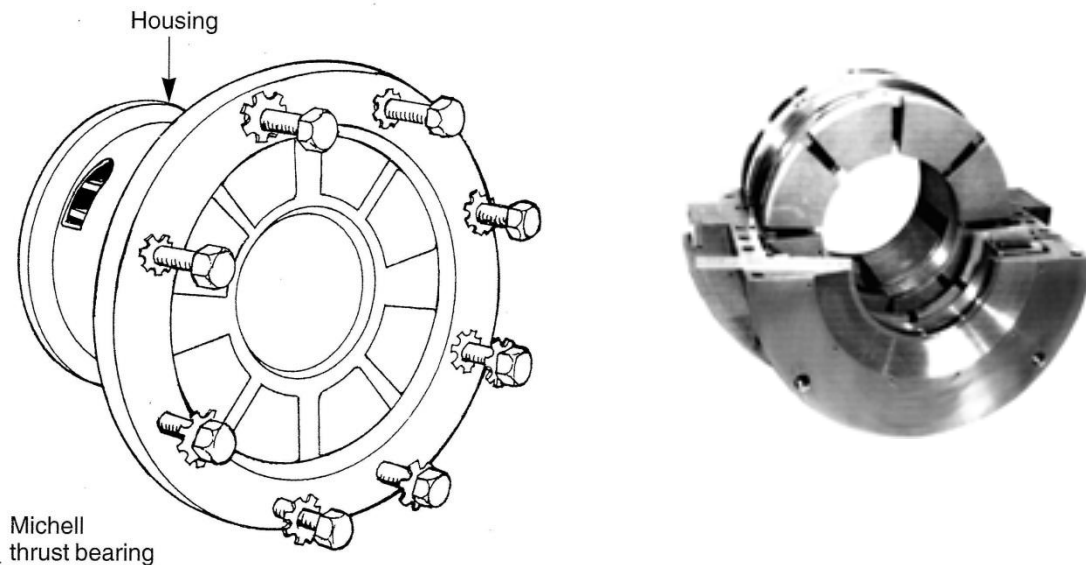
(b) Typical thrust block with the Mitchell thrust bearing in position
